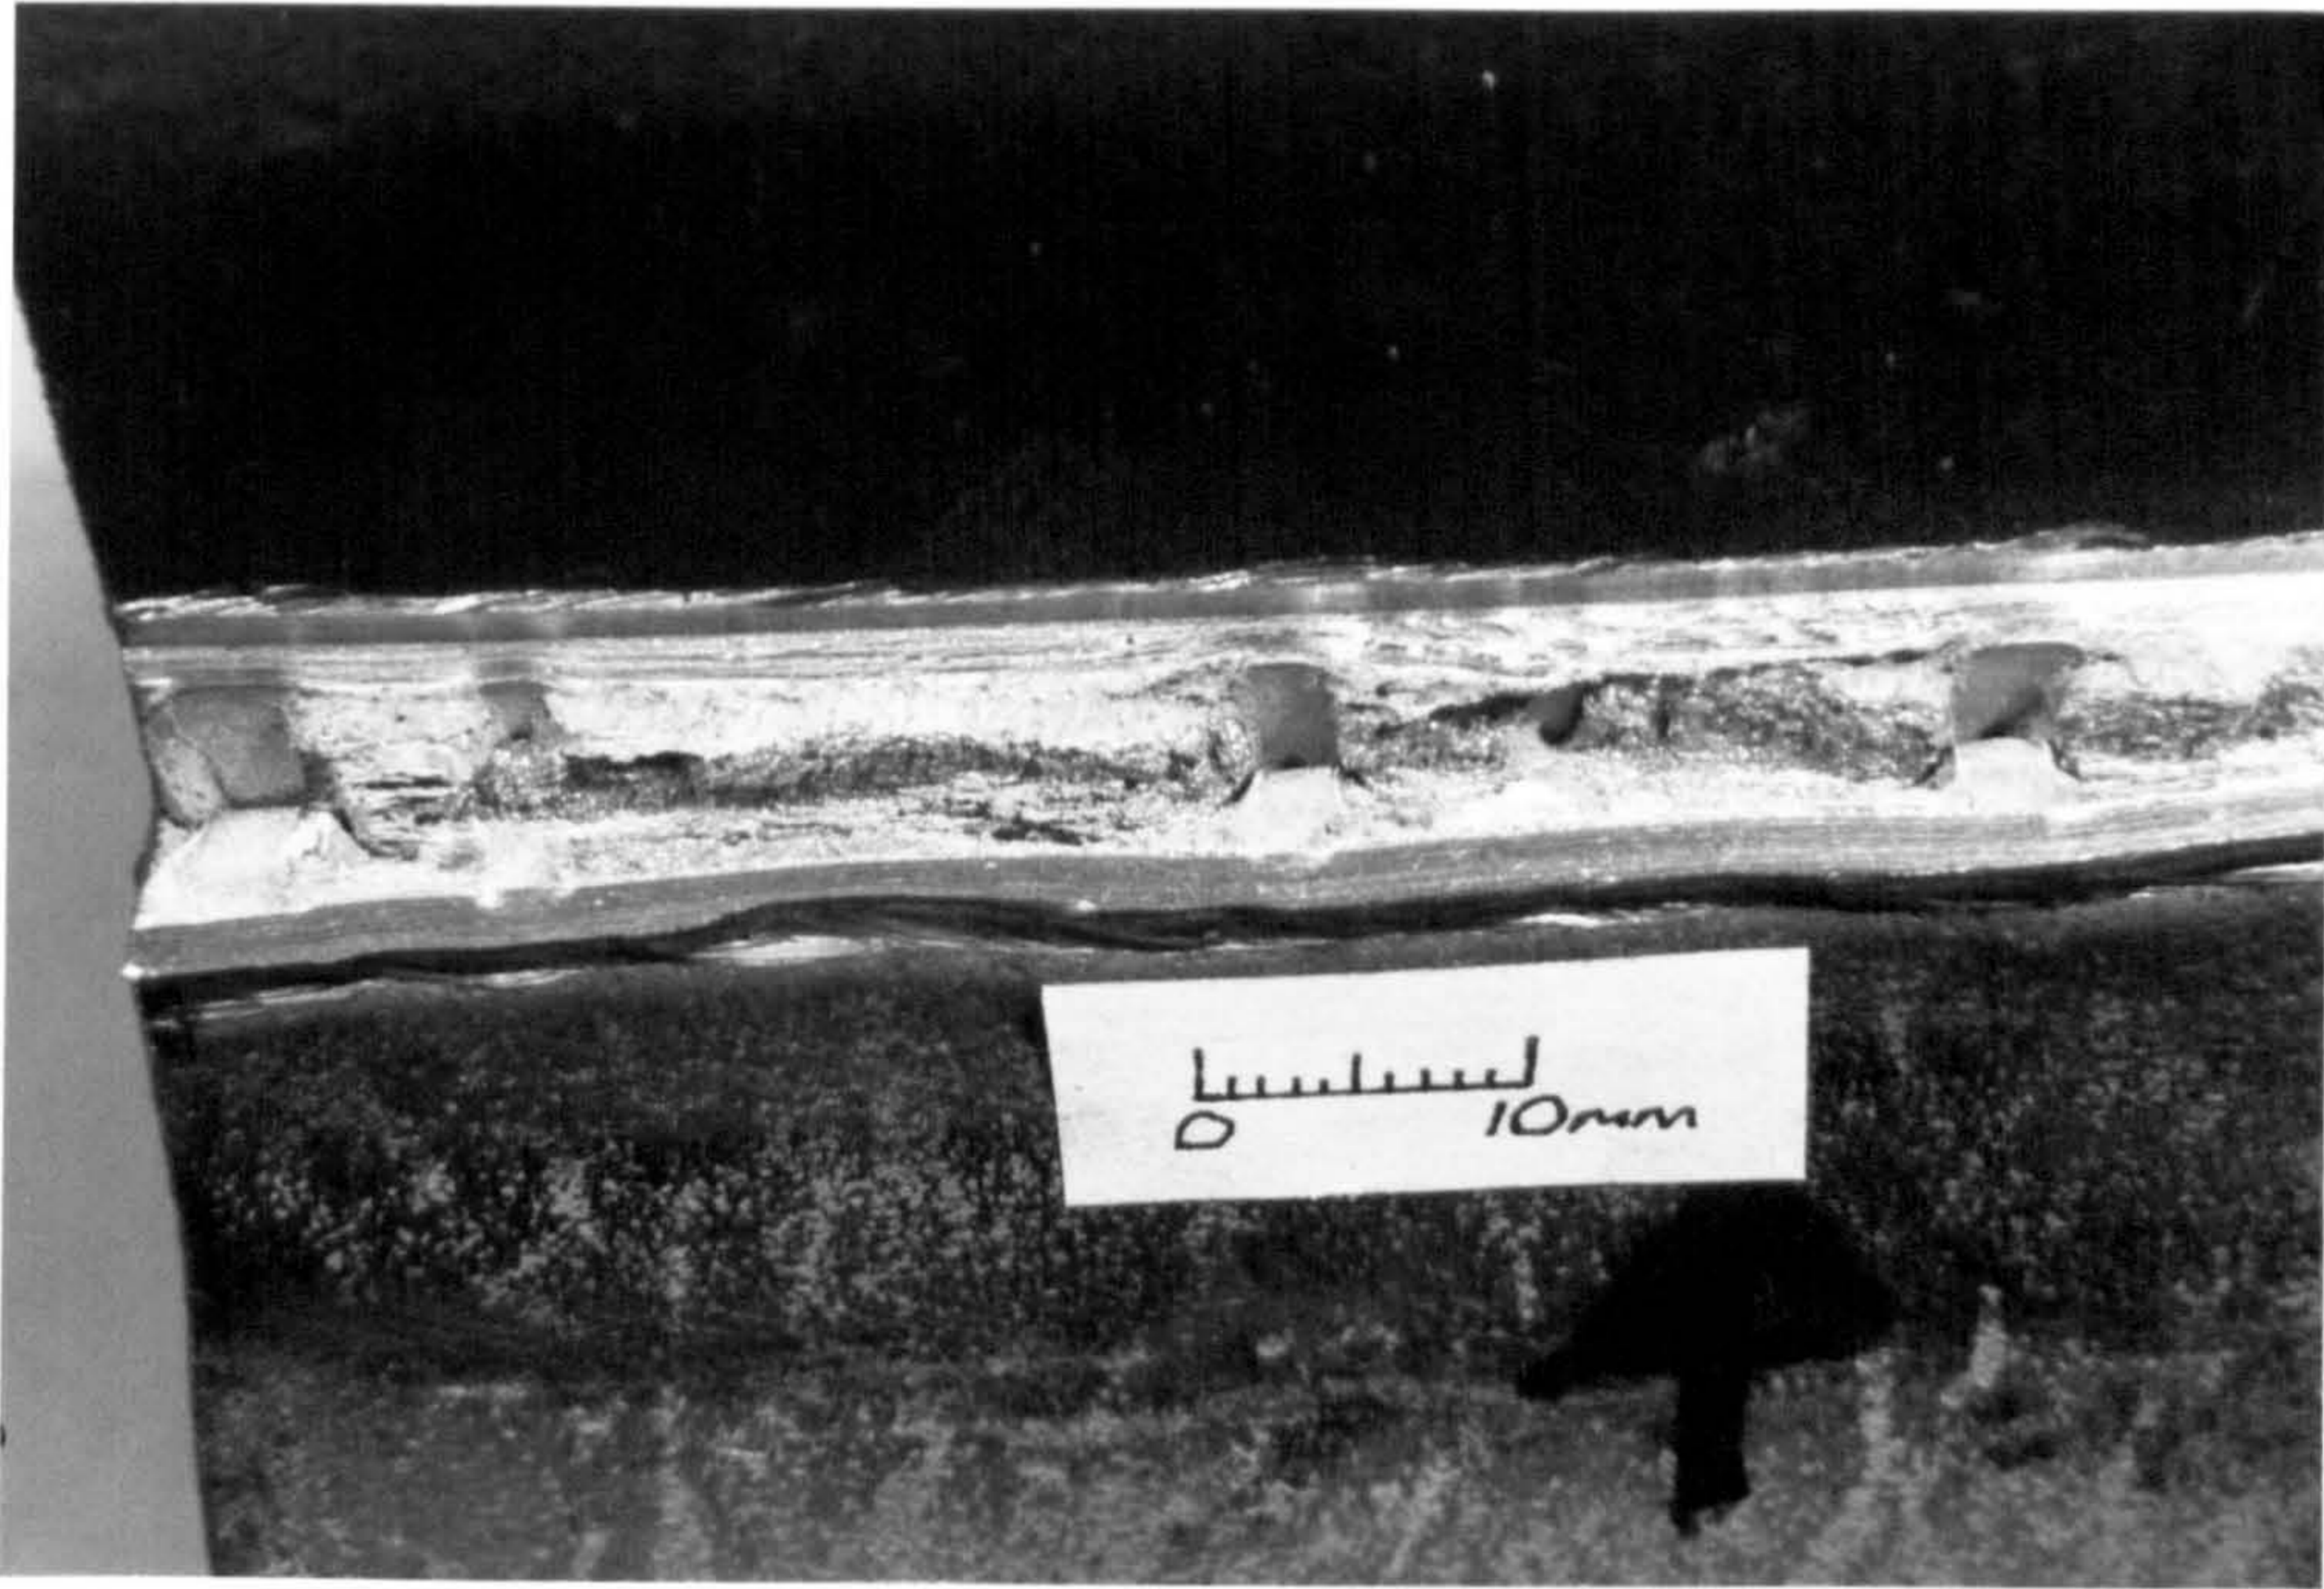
Initial failure during fillet fracture testing due to zones of hot cracking
